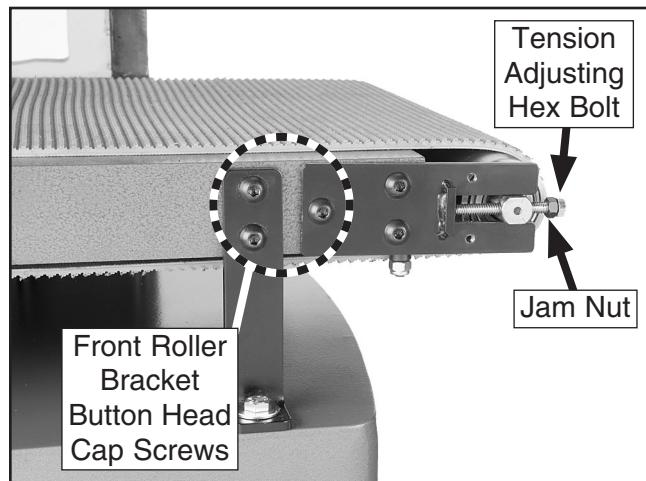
Conveyor belt tensioning fasteners and front roller bracket.
